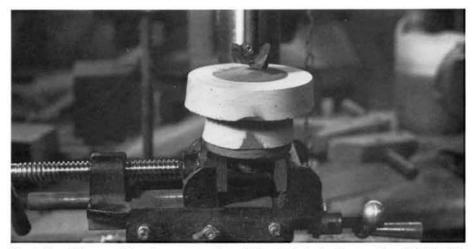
After marking the center point of the clock body, line up the drill bit with the center mark. Drill a hole for the clock mechanism.
